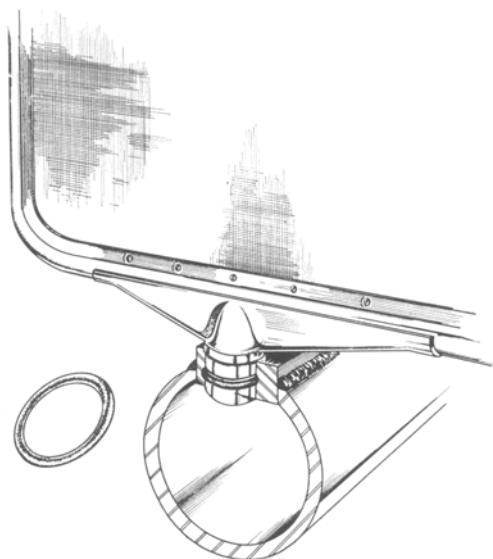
Leaf nozzle construction showing O-ring gasket.
